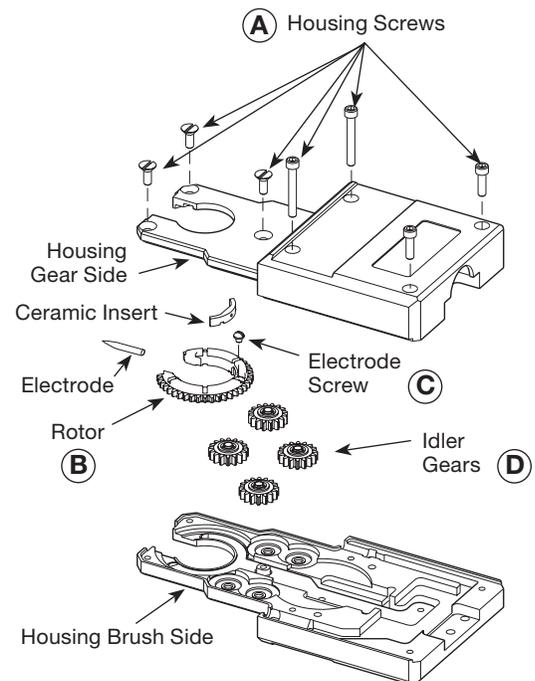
Removing Series 8 Micro Weld Head Components for Cleaning
